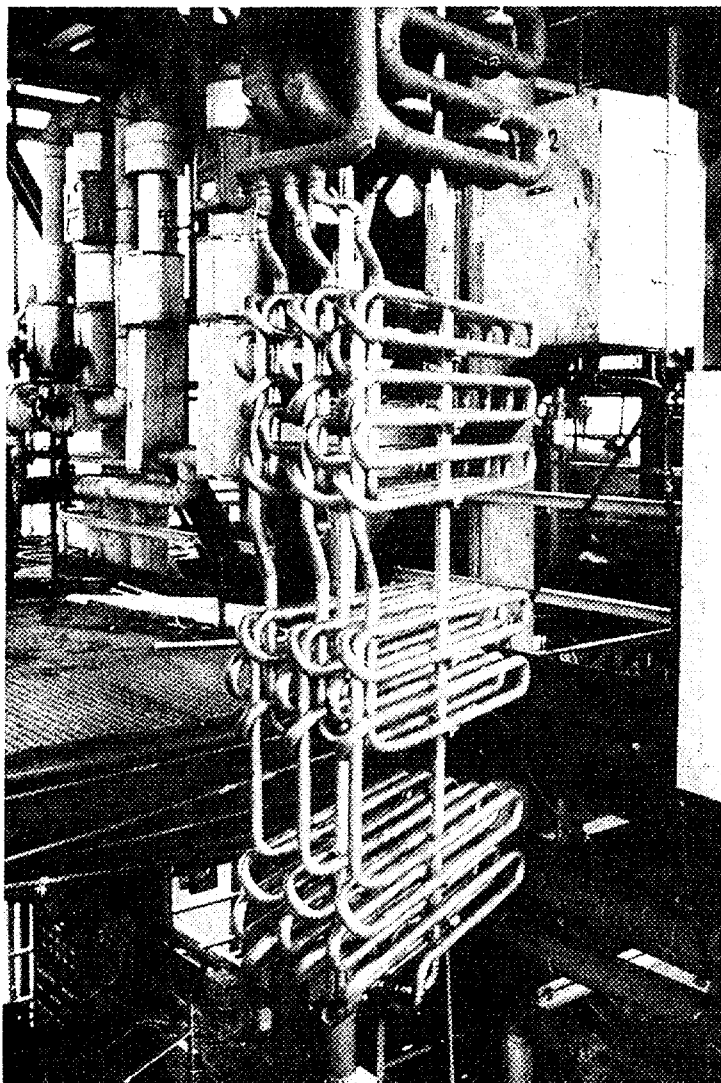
Heat exchanger tube bundle of the gas-fueled steam superheater
